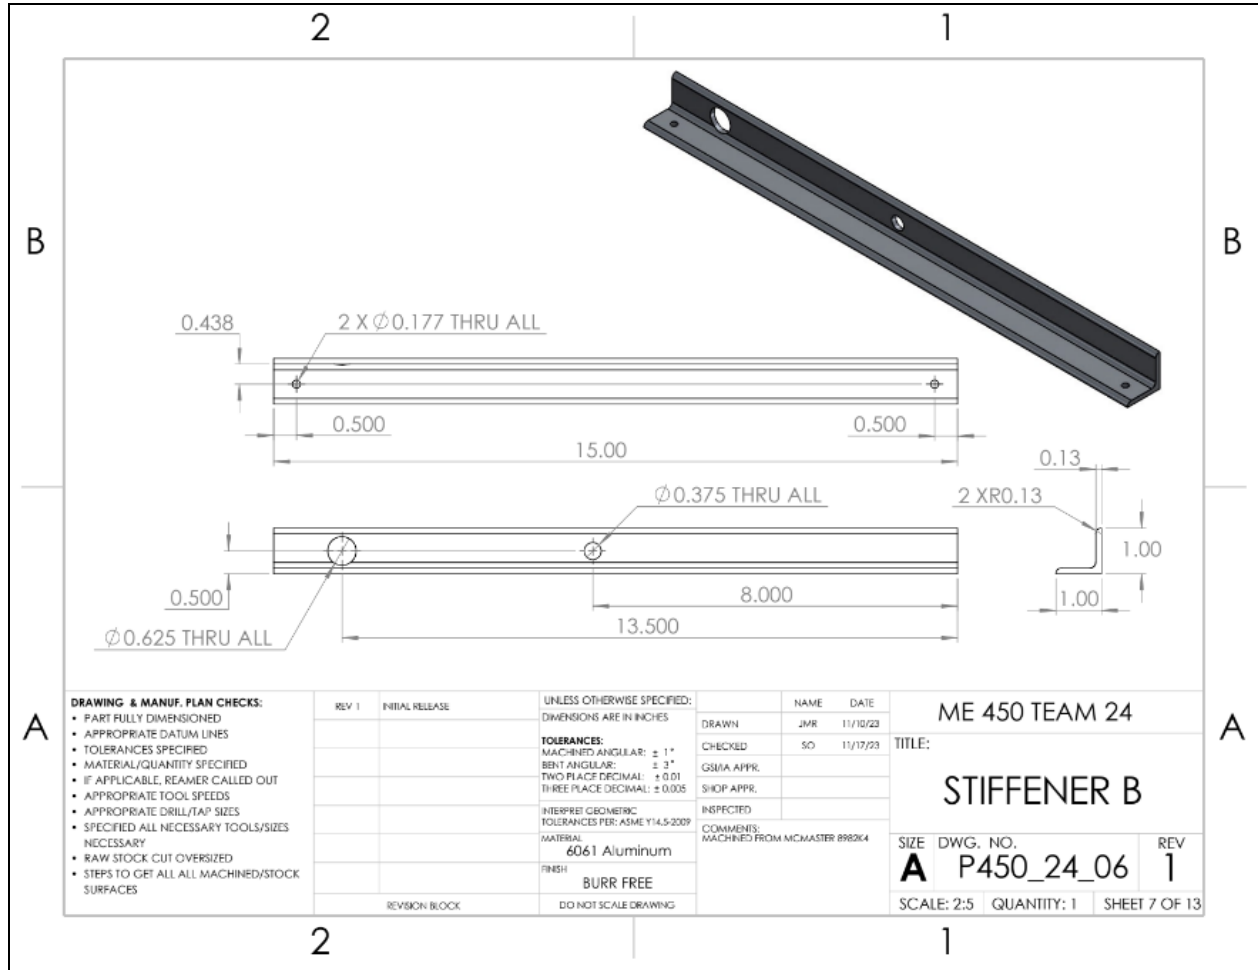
Manufacturing drawing for the second of the stiffener components of the beta design.
